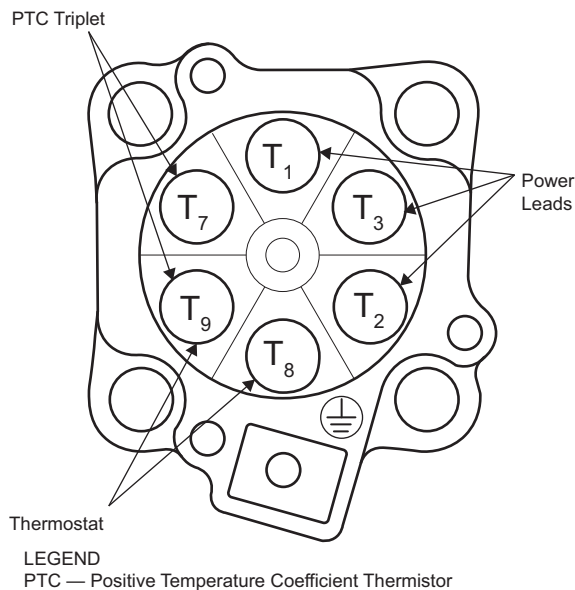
6-Pin Universal Terminal Plate Arrangement
